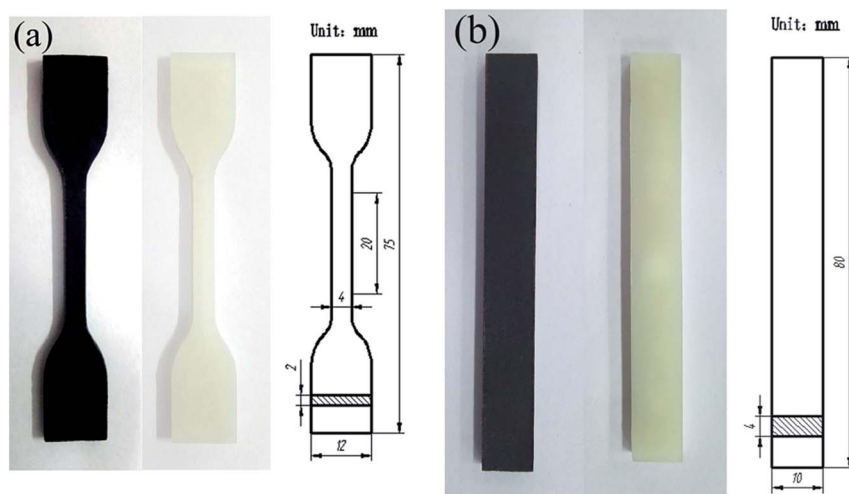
Geometry of the mechanical specimen (a) tensile test and (b) impact test.
